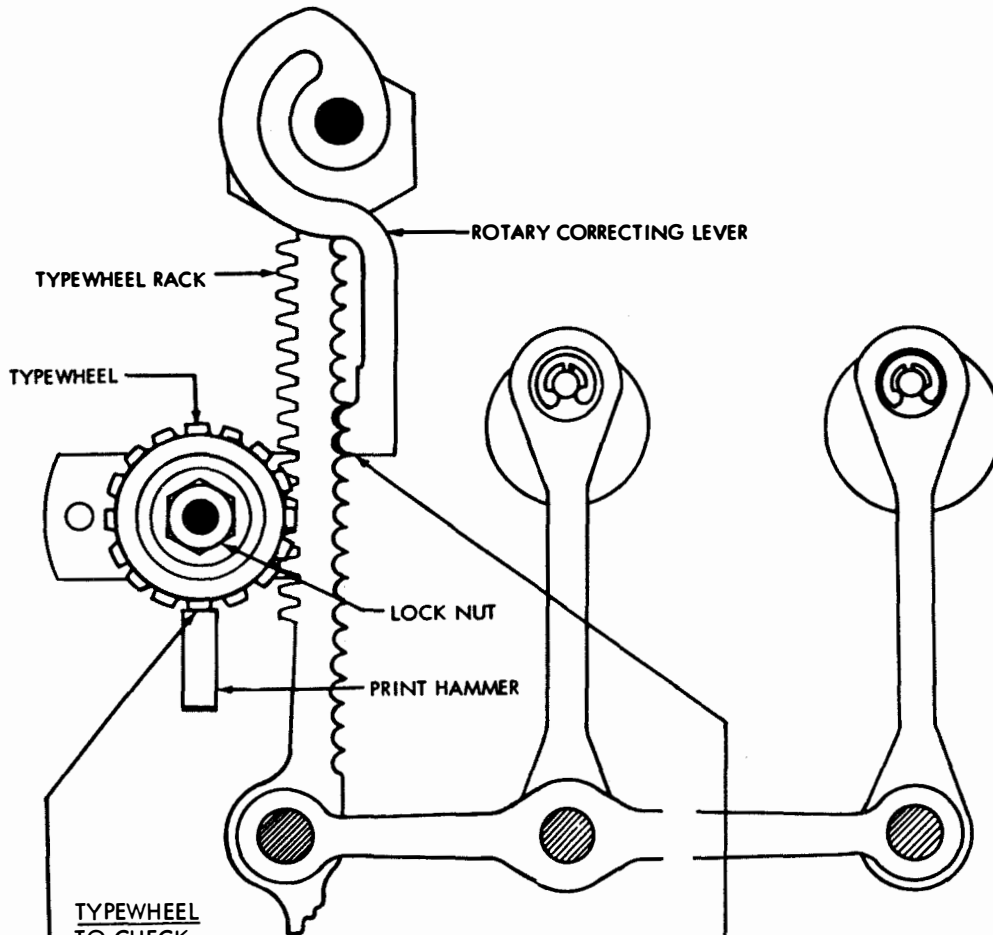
Printing Mechanism for Fully Perforated Tape (TT-253A/UG)
